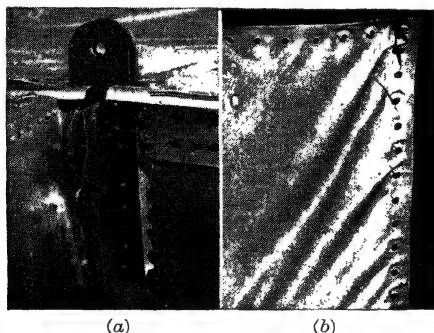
8.—Types of failures in riveted joints. (a) Tearing and shear of sheet, (b) tension and crushing of sheet.
